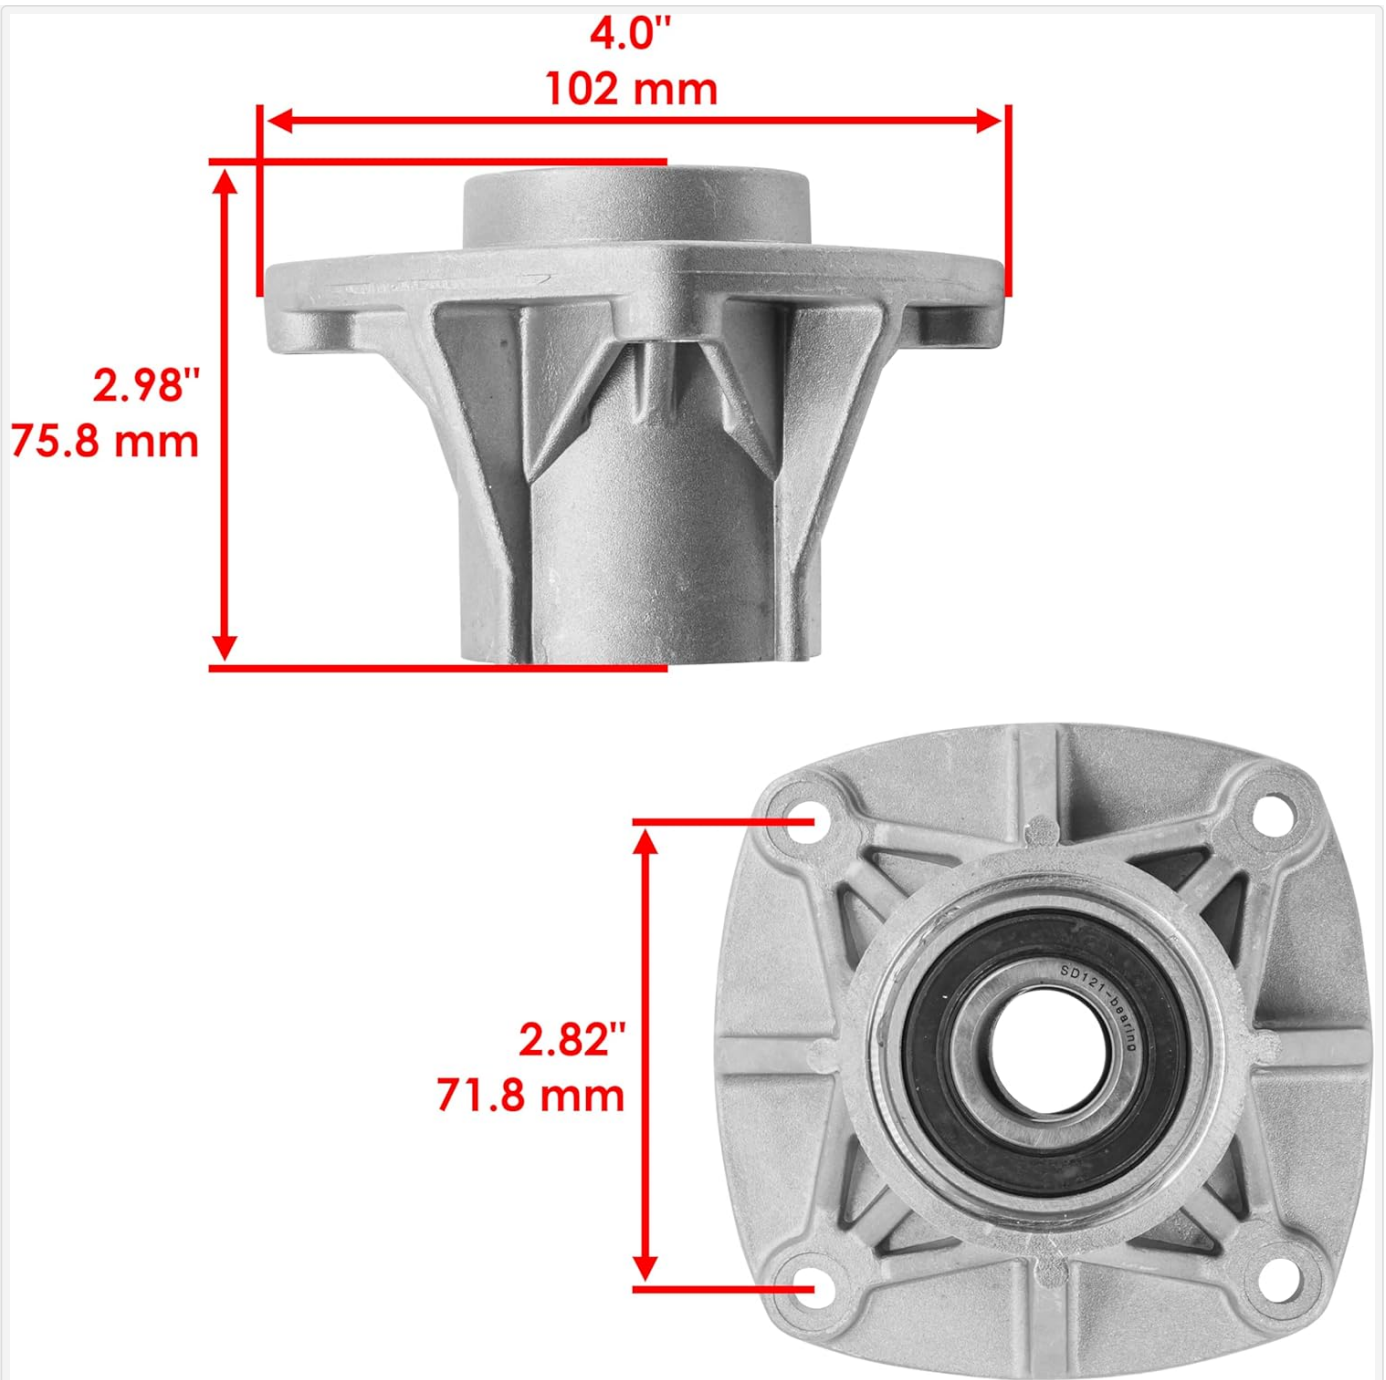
Top and side views of the Caltric Spindle Assembly with critical dimensions for verification.
